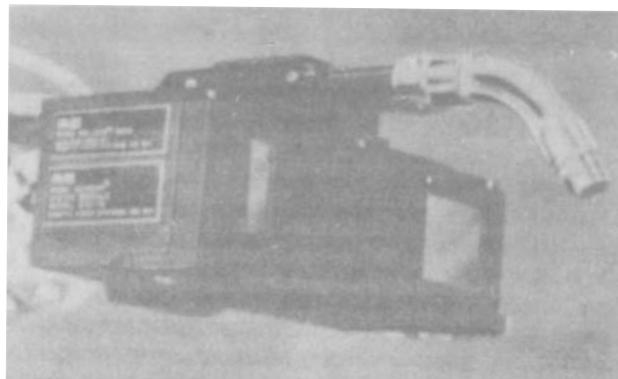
Robo Welder Series 1200 seam tracking vision system. (Photo courtesy: Robotic Vision Systems Inc.)
